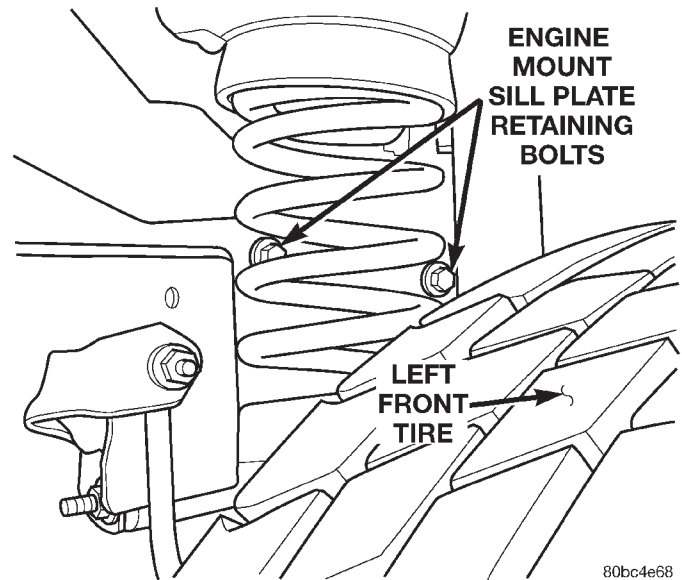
Engine Mount Sill Plate Bolts - Left Wheel Well
